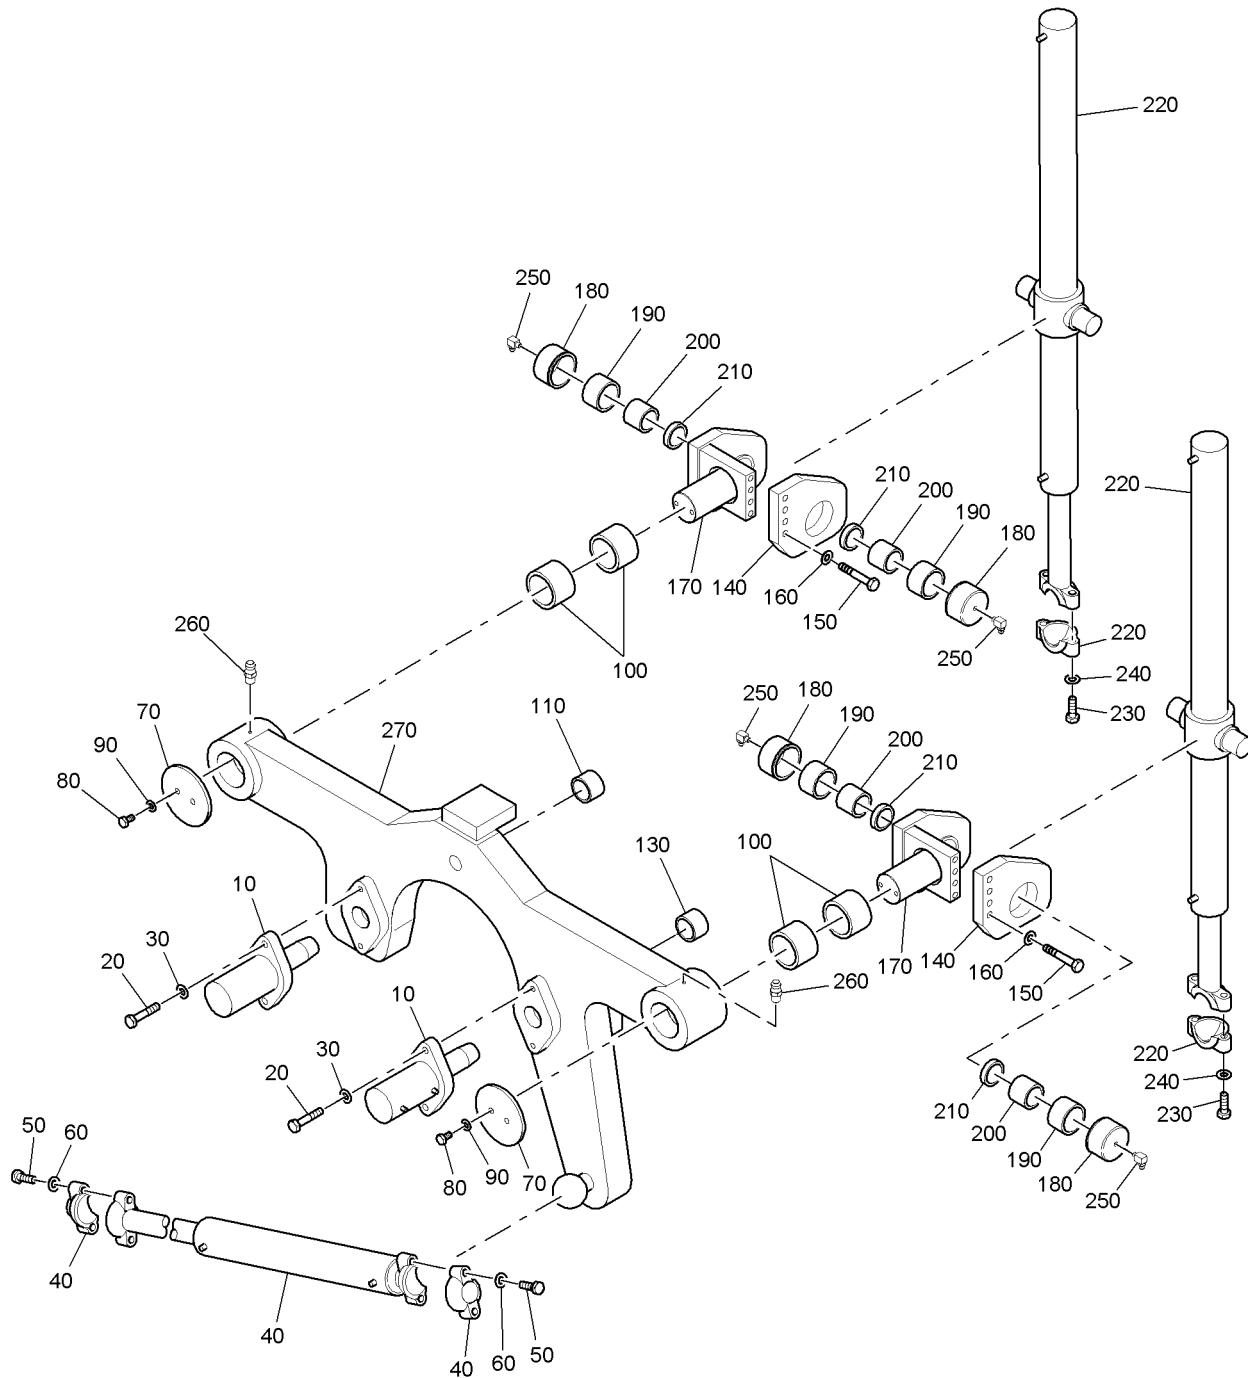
YOKE ASSEMBLY (SHEET 1 OF 2)
